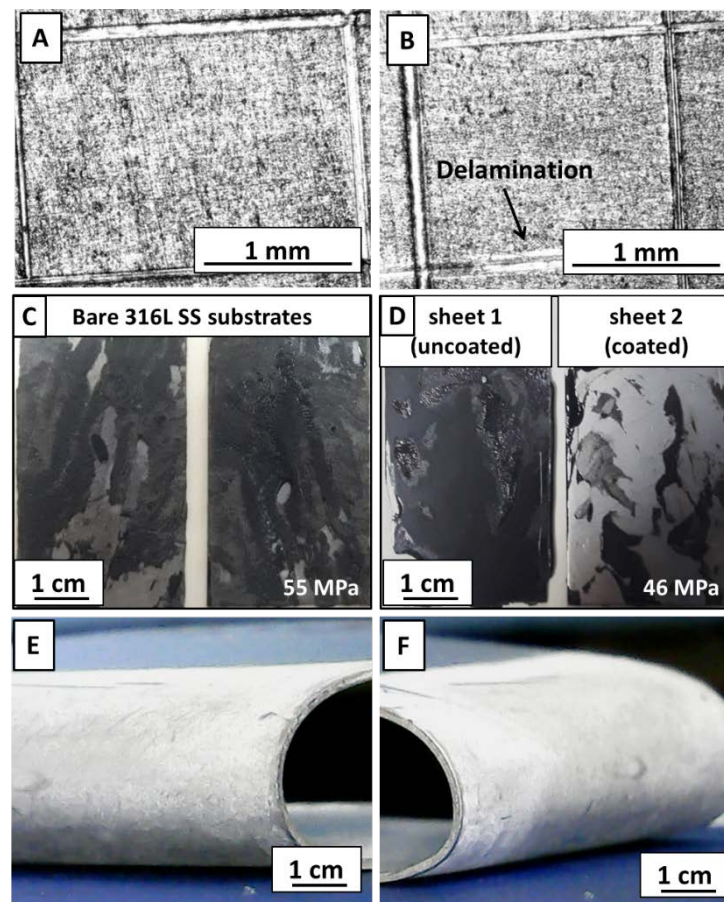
Tape test on composite coating: (A) before and (B) after removing tape, Tensile test: (C) detached bare 316L SS sheets and (D) bare 316L SS sheet 1 detached from coated sheet 2, Bend test: (E) pure zein coating, and (F) composite coating without any cracks.
